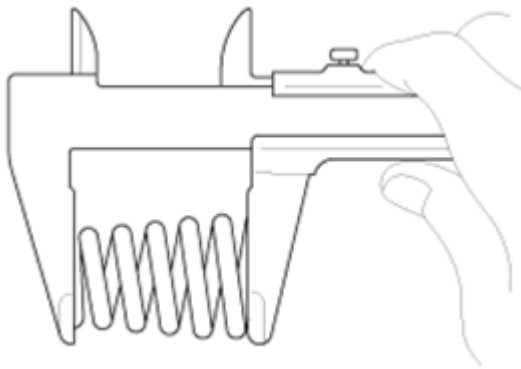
Measuring Valve Spring Free Length Using Vernier Caliper
